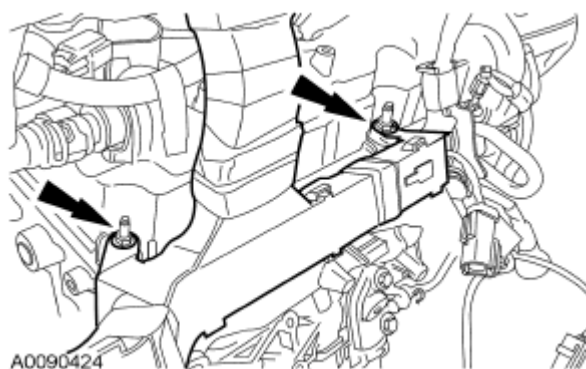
Locating Engine Control Wiring Harness & Nuts
